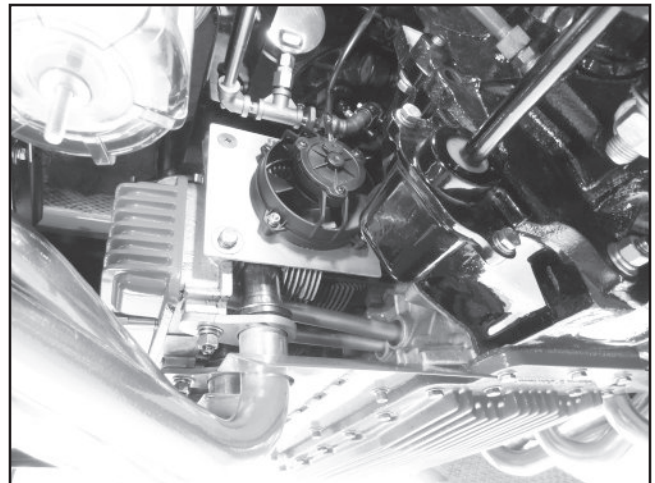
Puller 4" fan mounted on the bottom of the oil cooler.
